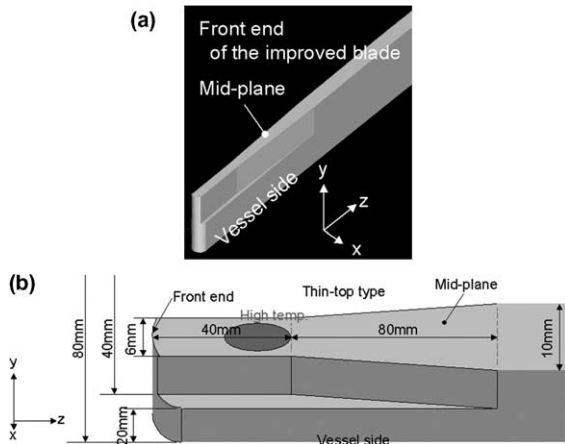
Improved blade – thin front-end blade – (a) Analytical model and (b) schematic drawing.
